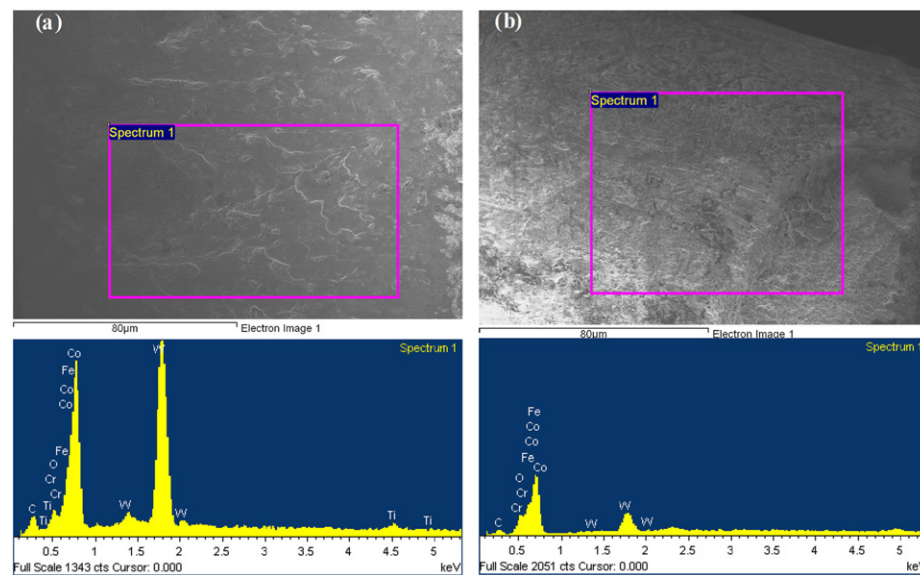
EDS spectrum of the worn flank face of both inserts when cutting test finished at the cutting speed of 176 mm/r. (a) Ultrafine insert and (b) conventional insert.
